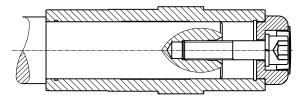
Gear unit mounted to shaft with a shoulder using the fastening element
